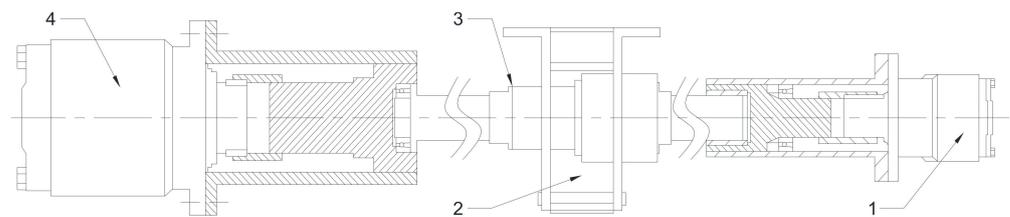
Double regulating mechanism structure of speed and opening. 1: Speed hydraulic motor; 2: Fertilizer discharge box; 3: Fertilizer discharge stop shaft; 4: Opening hydraulic motor.
